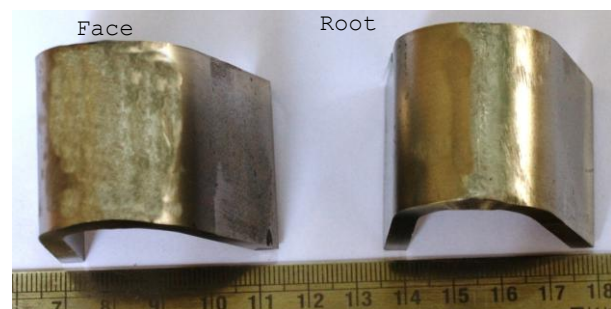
Bend Test of welded plate by PCGTA using filler of ERNiCrCoMo1
